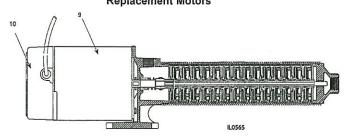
Cartridge Assembly Includes Discharge Bearing, Shaft & Coupling Assembly, Diffuser Plate, Impellers, Diffuser Bearings, Diffusers and O-rings
